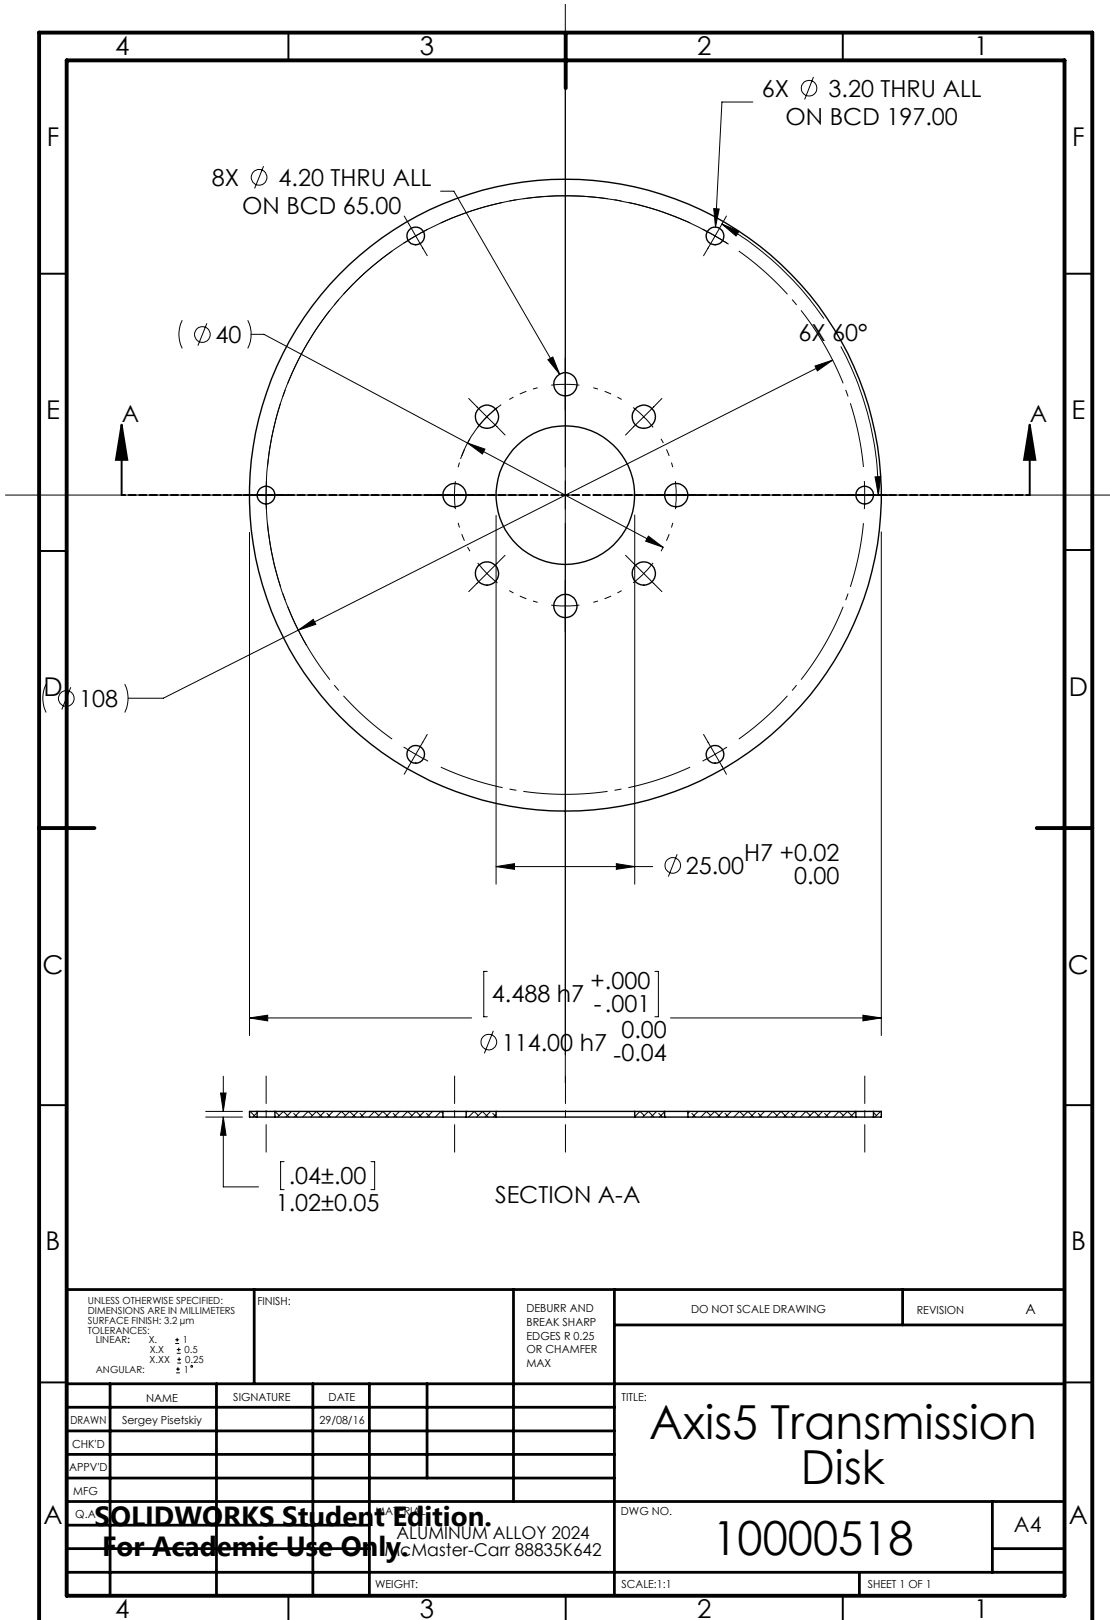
Drawing: Joint 5 clutch transmission disk.
